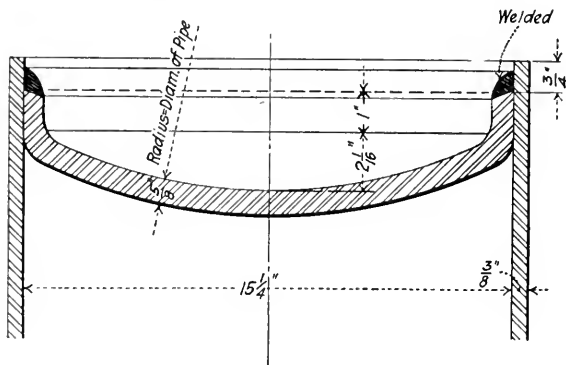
SHAPE AND DIMENSIONS OF SPECIMEN CONTAINERS
